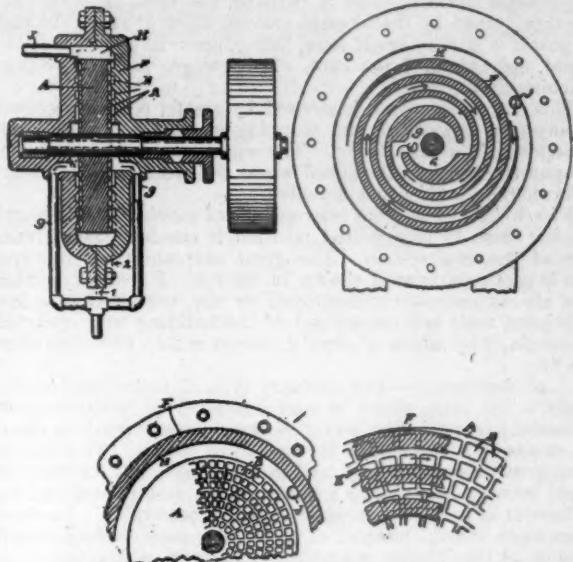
DETAILS OF THE MC ELROY TURBINE.
